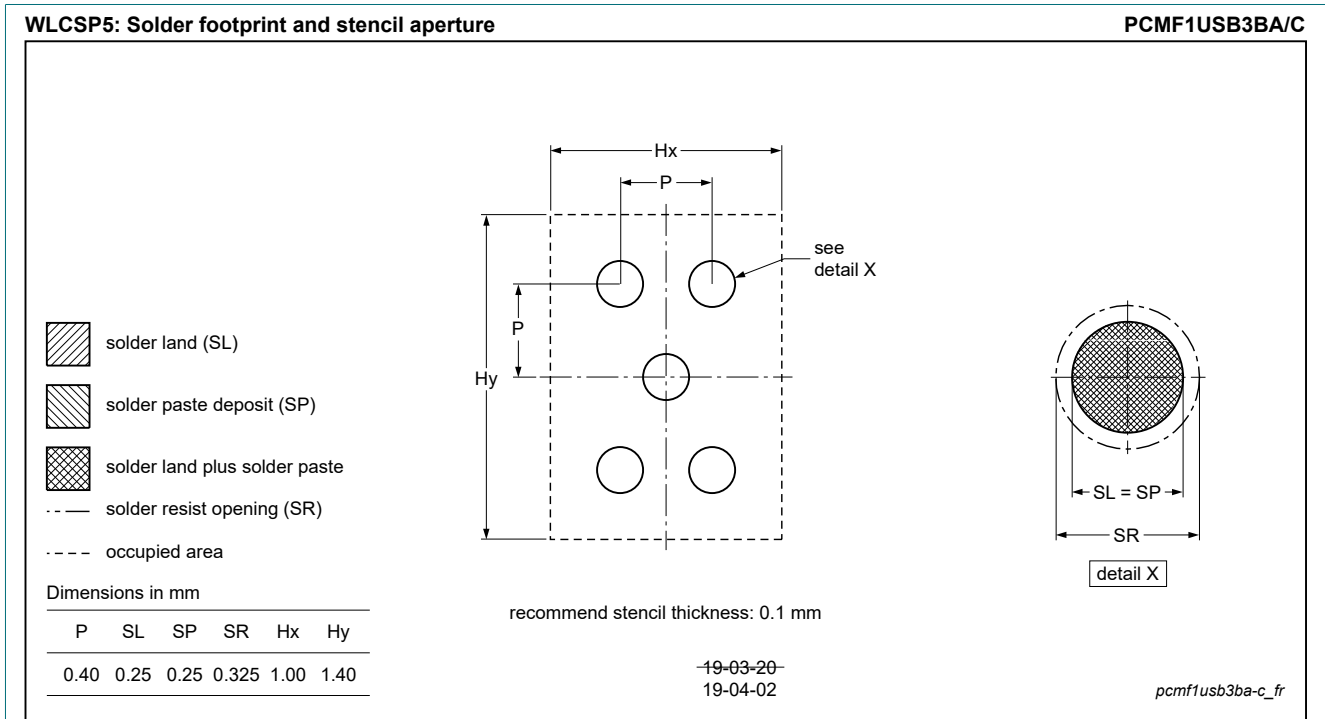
Soldering footprint WLCSP5 (PCMF1USB3BA/C)
